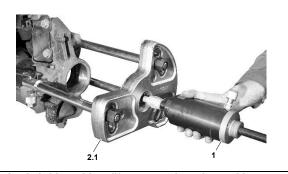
Apply bridge with pull/pressure plate along with wheel hub bearing unit against steering knuckle.
